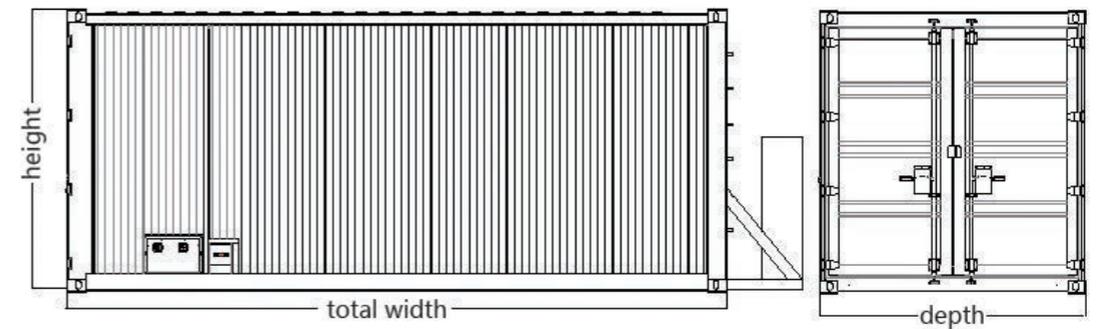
Dimensional Drawing of G31-10kV-Outdoor-Water Cooling FGSVG-C2.0/10-OW
